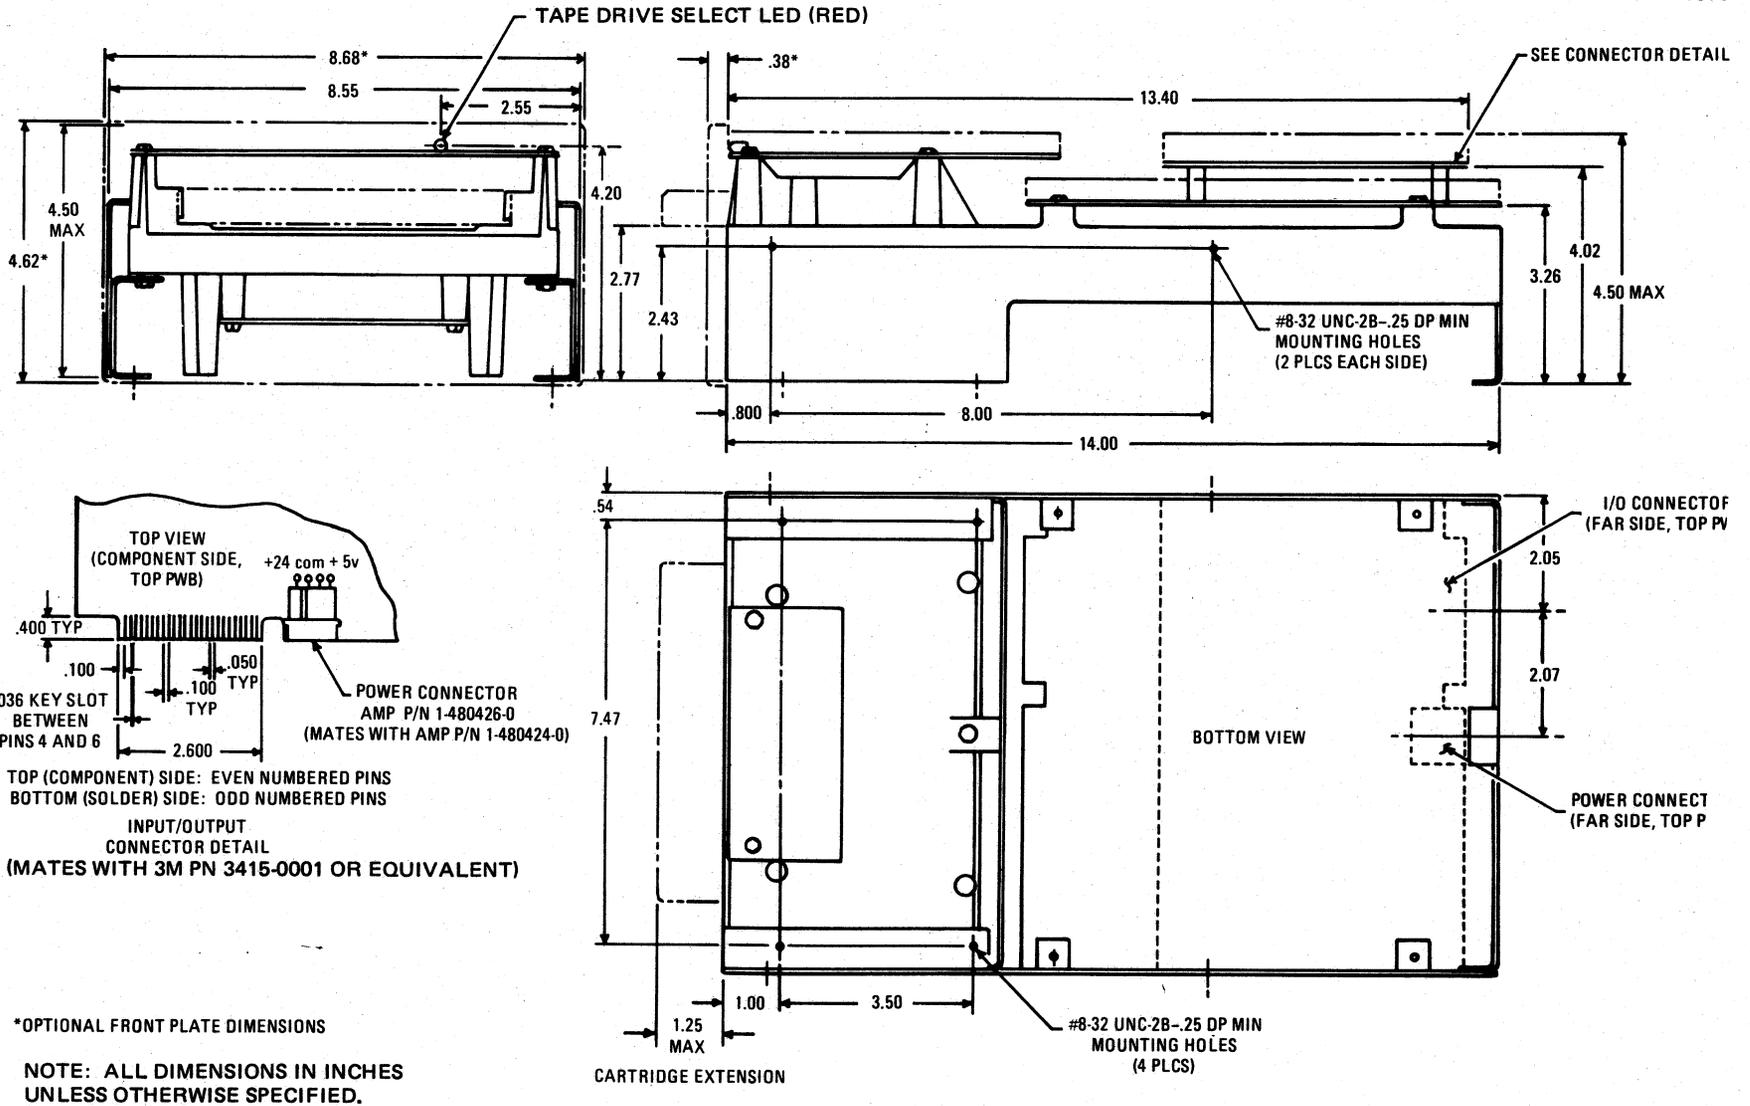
Quarterback Tape Drive Mounting Dimensions
